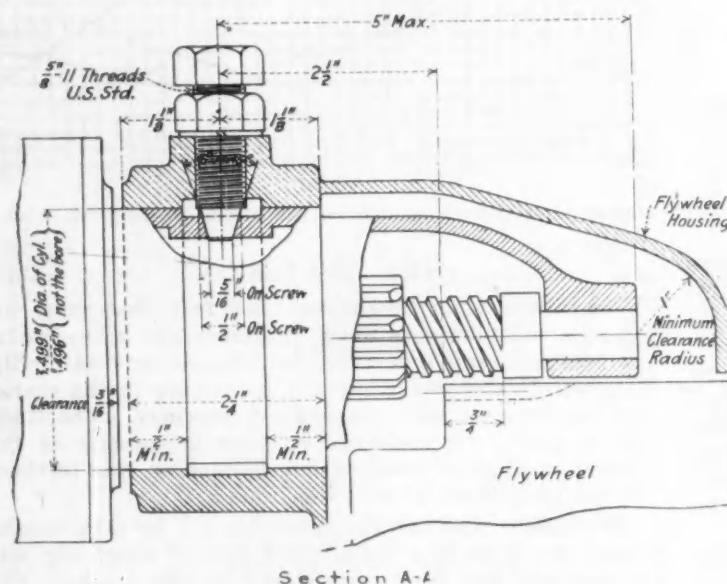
CYLINDER TYPE MOUNTING FOR STARTING MOTOR
